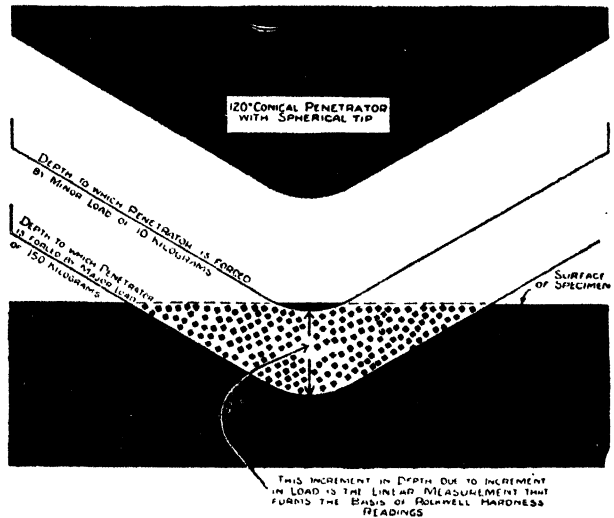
SECTION OF ROCKWELL IMPRESSION USING 120° CONICAL PENETRATOR
